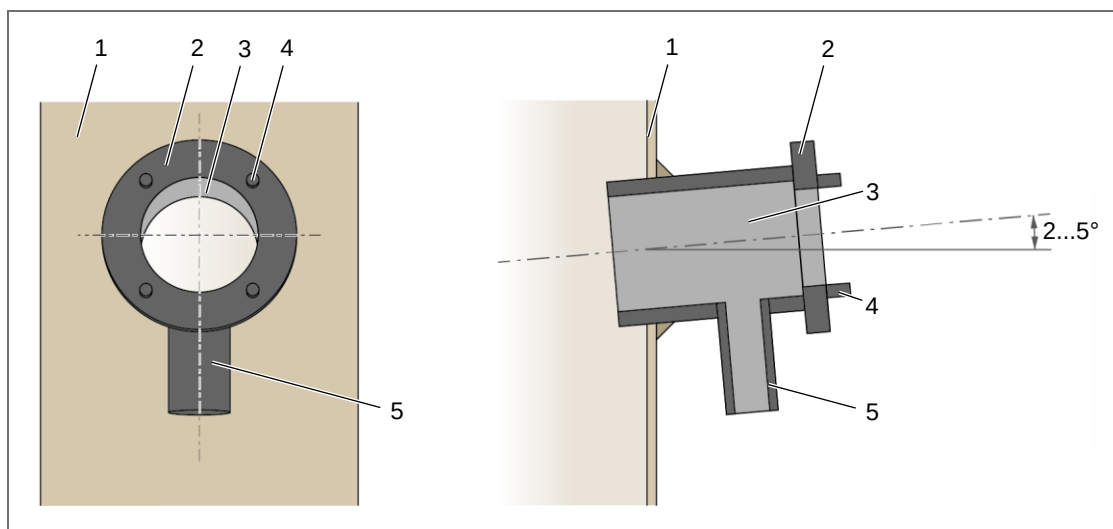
Mounting of welding flange – variant with integrated return
